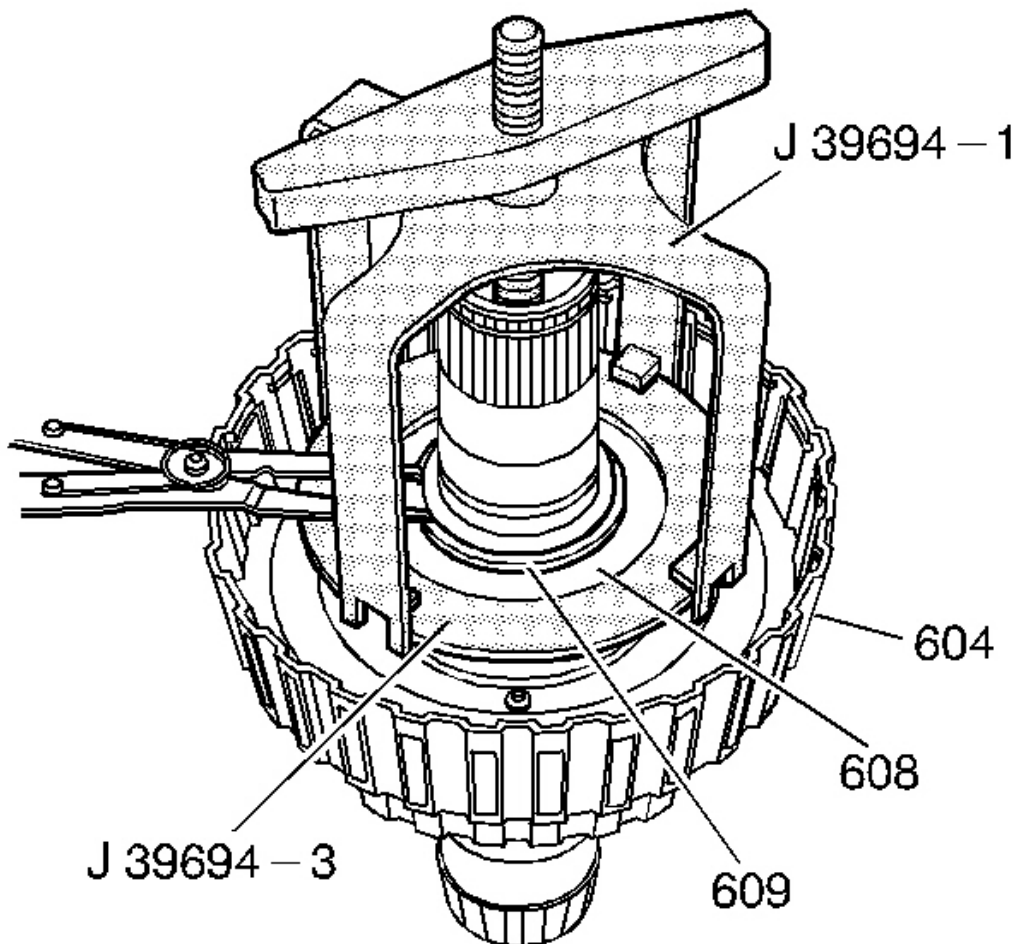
Installing Clutch Spring Compressor And Compress Spring Using J 39694
